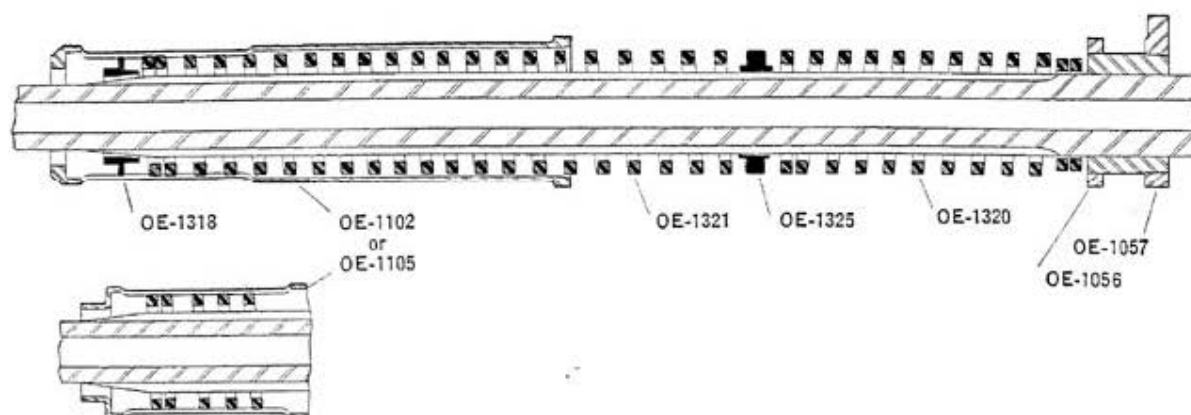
Installing Barrel Springs (Rectangular Wire Type)
